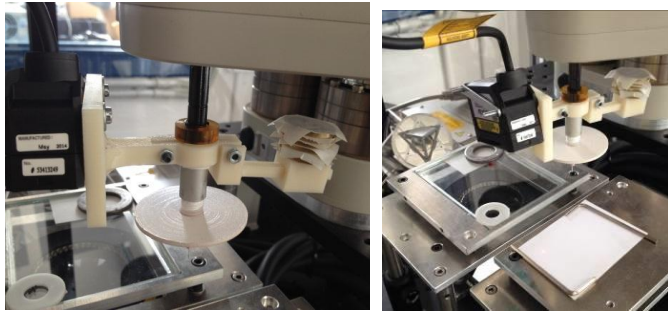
ASSEMBLY OF THE BRACKET AND SENSOR.
